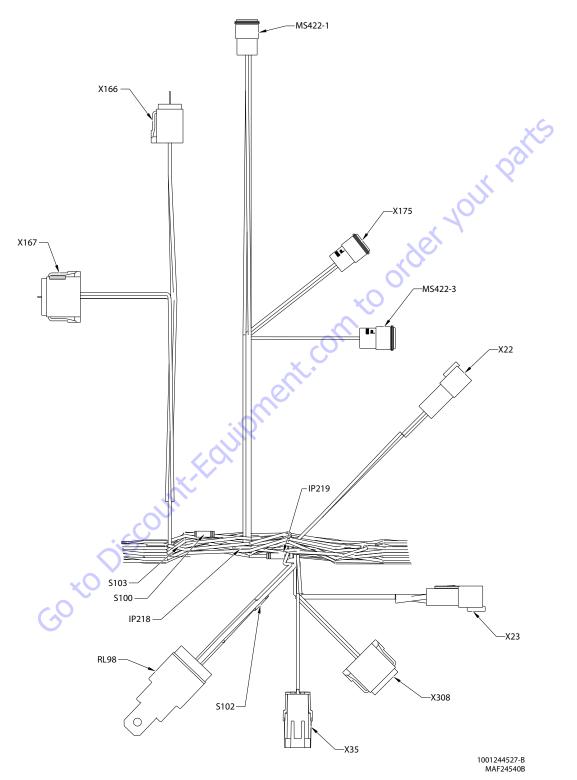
Mid Engine Harness - Sheet 4 of 10
